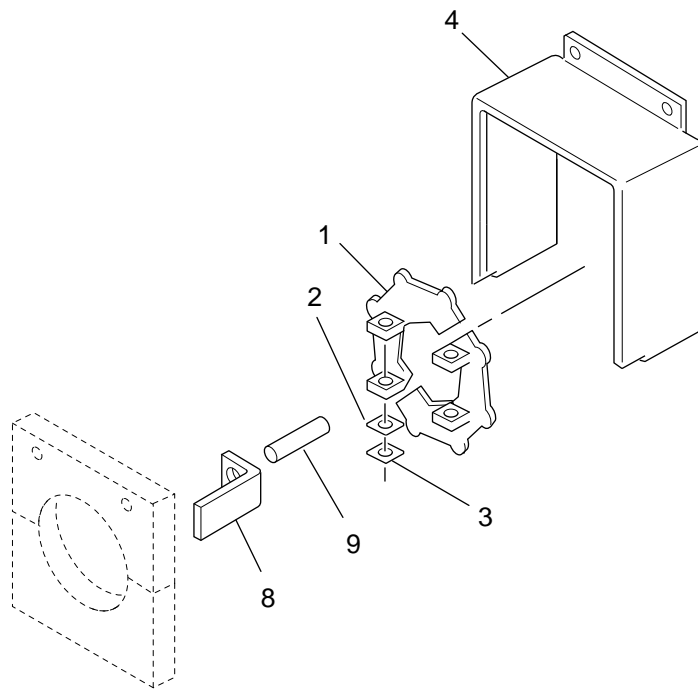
S.O.P. Proximity Sensors – Blade Shaft (#463579)
